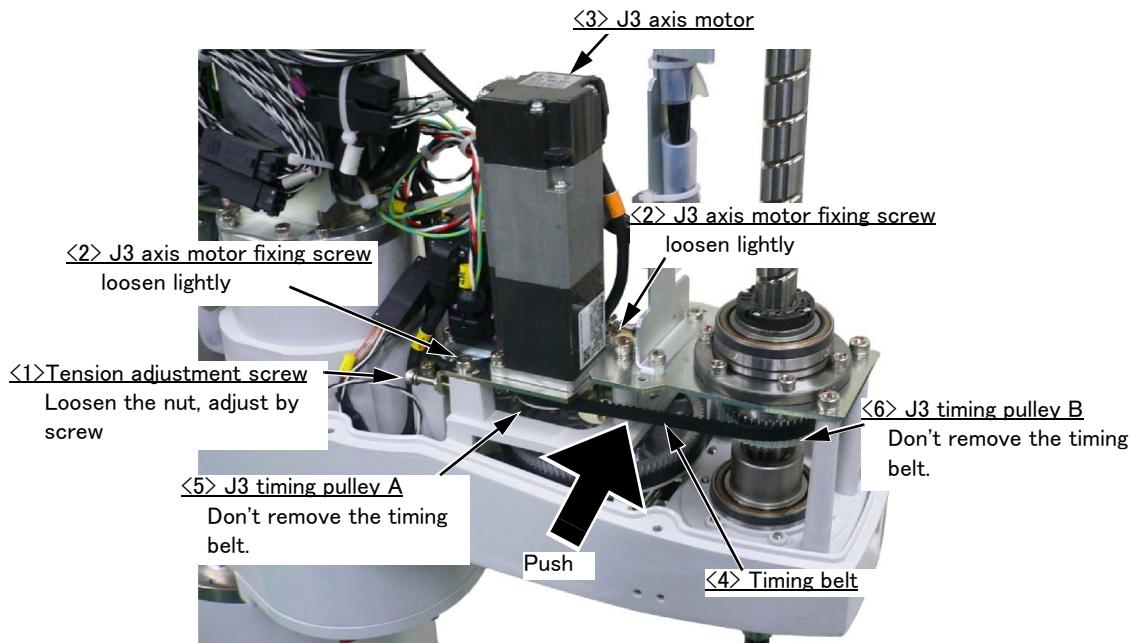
Inspecting/Adjusting the J3 axis timing belt
